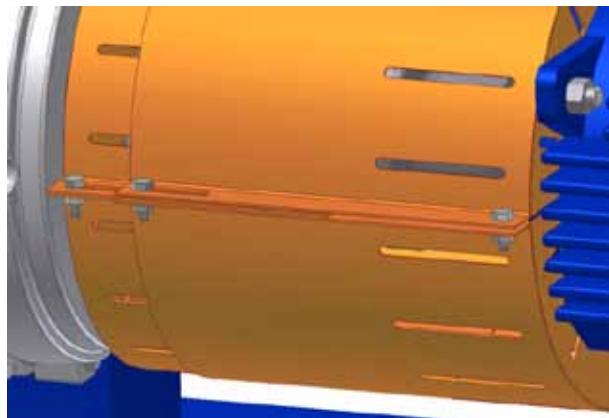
Positioning bolts, washers, and nuts on the upper and lower pump side covers.
